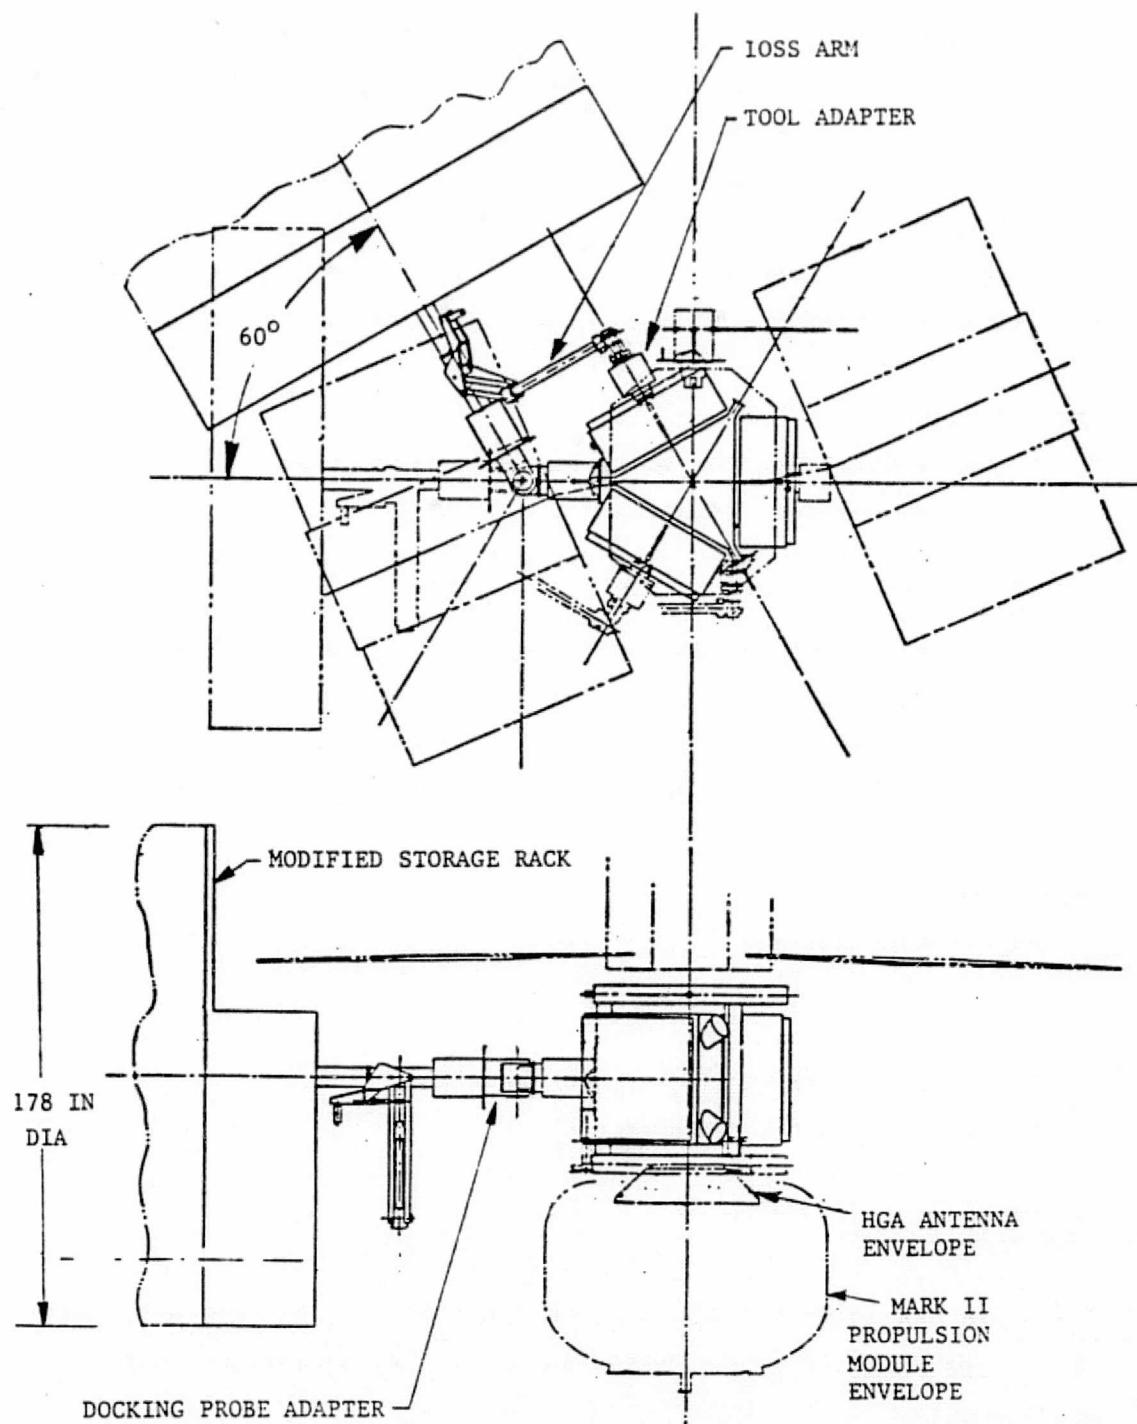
MMS Module Exchange Using Straight Docking Probe Adapter and Tool Adapter
